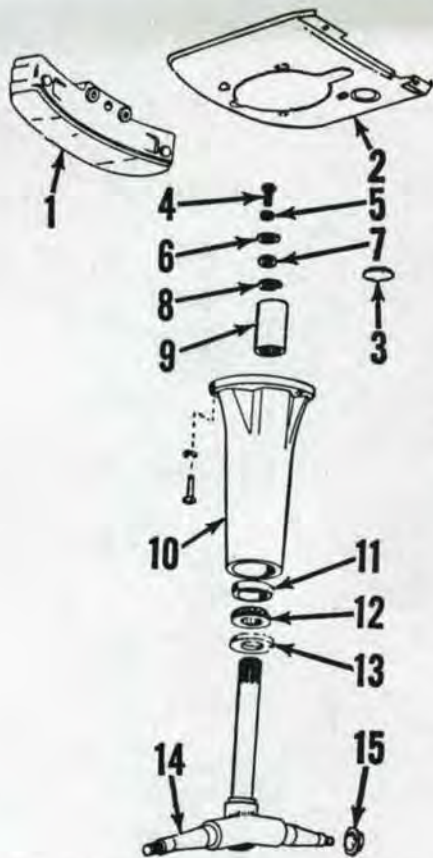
Exploded view of dual wheel pedestal and associated parts.
